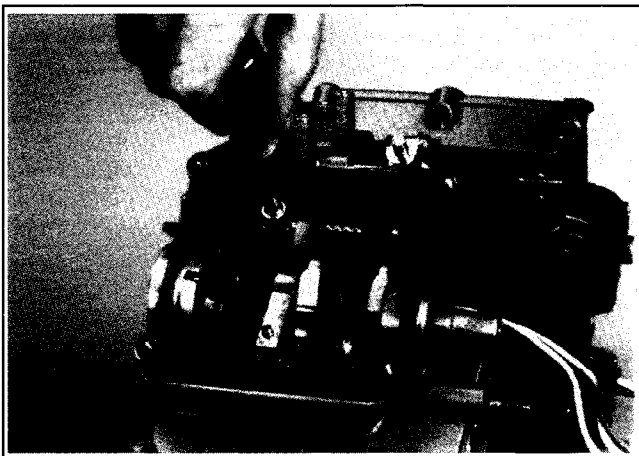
Installing Rocker Arm Assembly on #1 Side.
